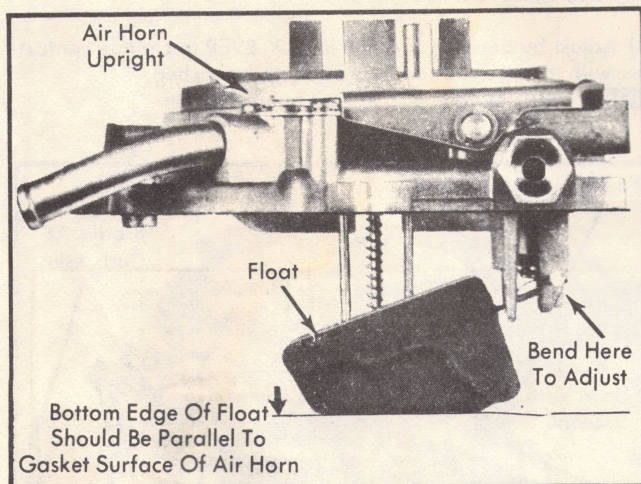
Checking Float Drop With Air Horn In Upright Position
